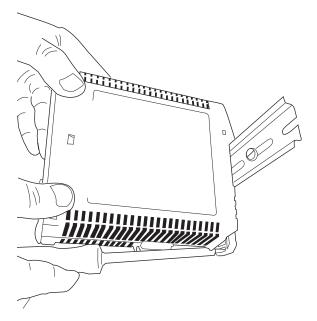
Removing the VT-HPC-1-1X from the DIN mounting rail
